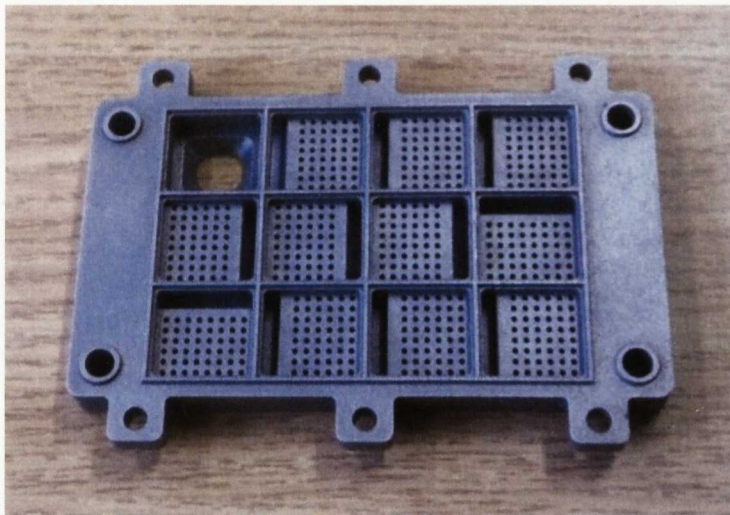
Jet impingement cooler specifically designed to cool the baseplate of the power module pictured in Figure 39.
